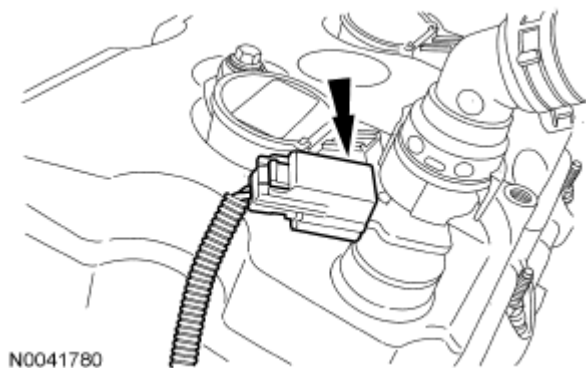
Locating Positive Crankcase Ventilation Valve Electrical Connector
